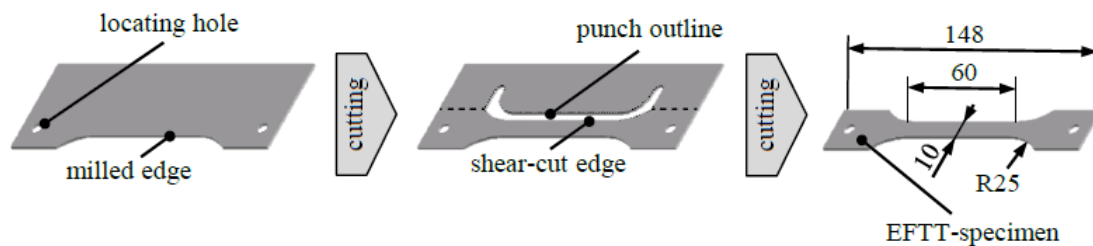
Manufacturing process of a blanked EFTT specimen with a closed cutting lines [12].
